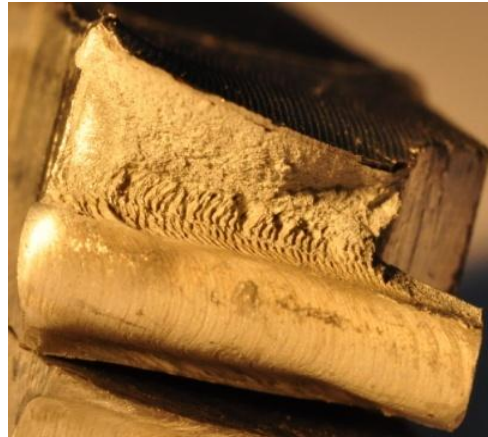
₁. Macrophoto. fracture (700rpm,125mm/min)
